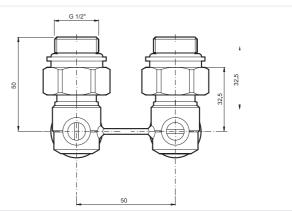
Dimensions Verafix-VKE angle with flat seal and double nippel
